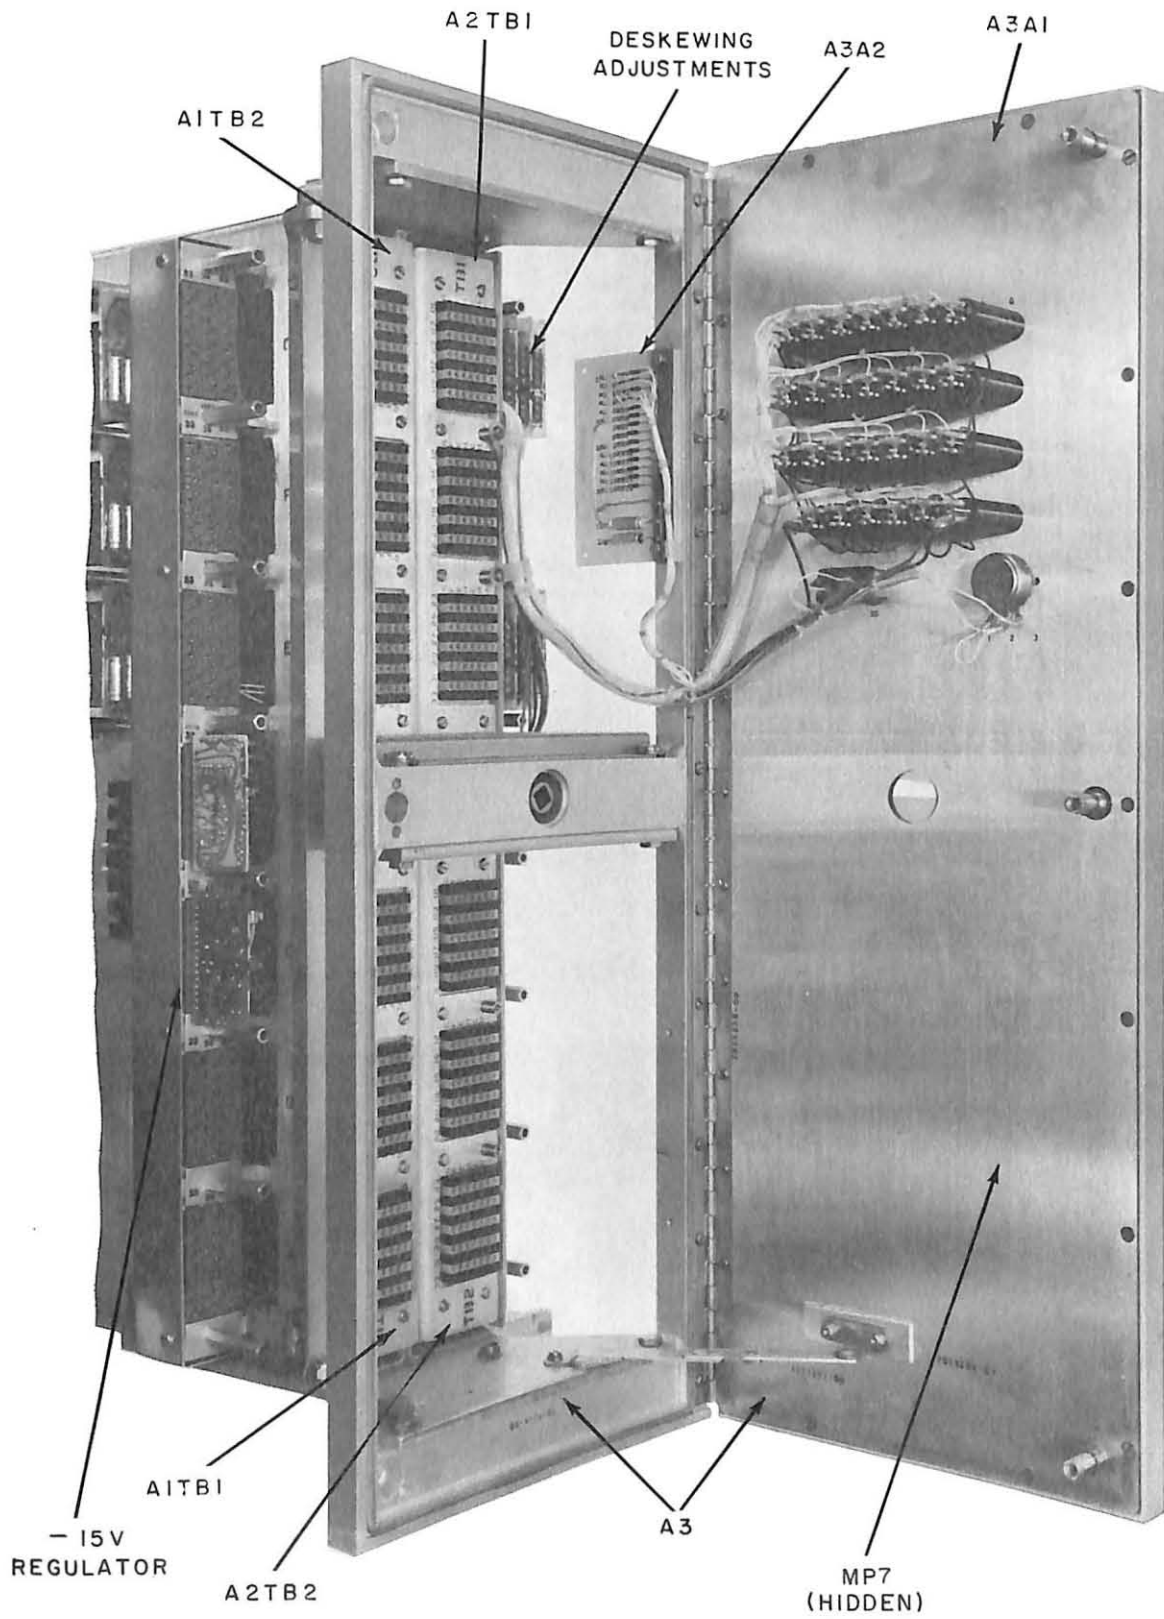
Drawer Assembly A13, Front End, Panel Open
